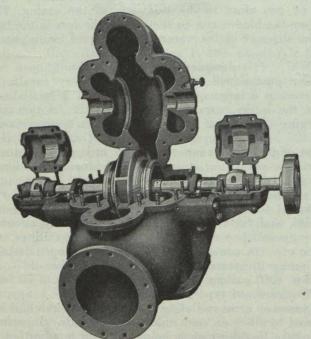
Double-Suction Volute Pump, with Casing Open Ready for Inspection
